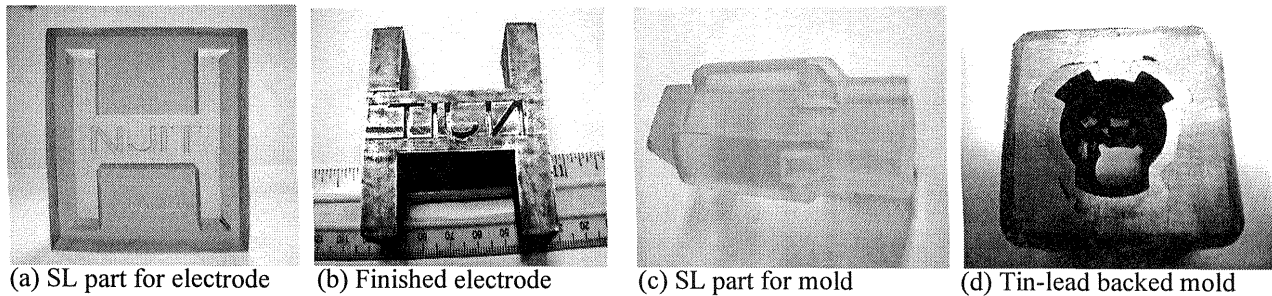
Electroformed electrode and Mold generated by the tooling process.
